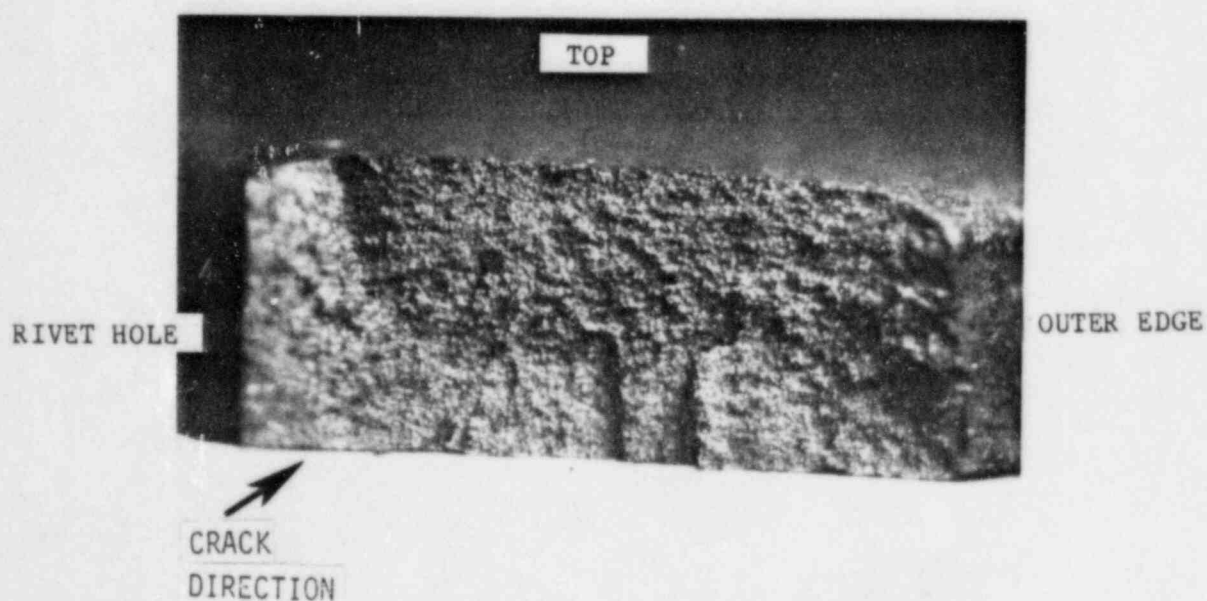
Photomacrograph of the Bottom View of the Fracture in Spring DB-10 After Removal and Fracturing the Remaining Ligament. 8X.
